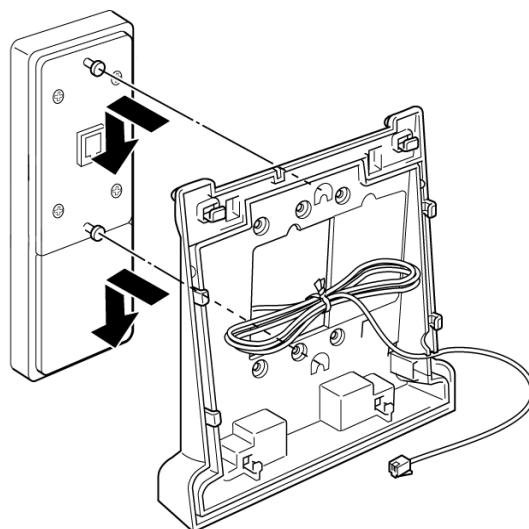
Wall Mounting Base Plate on Wall Plate
